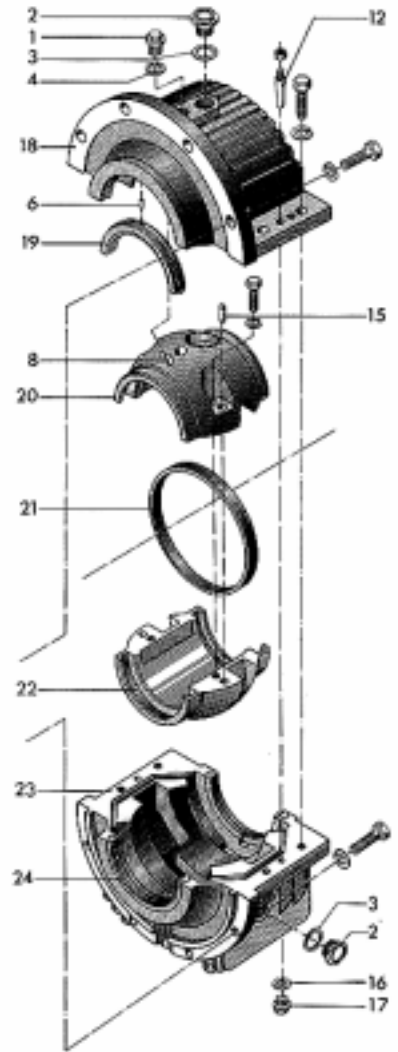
Flange-type sleeve bearing for forced-oil lubrication
